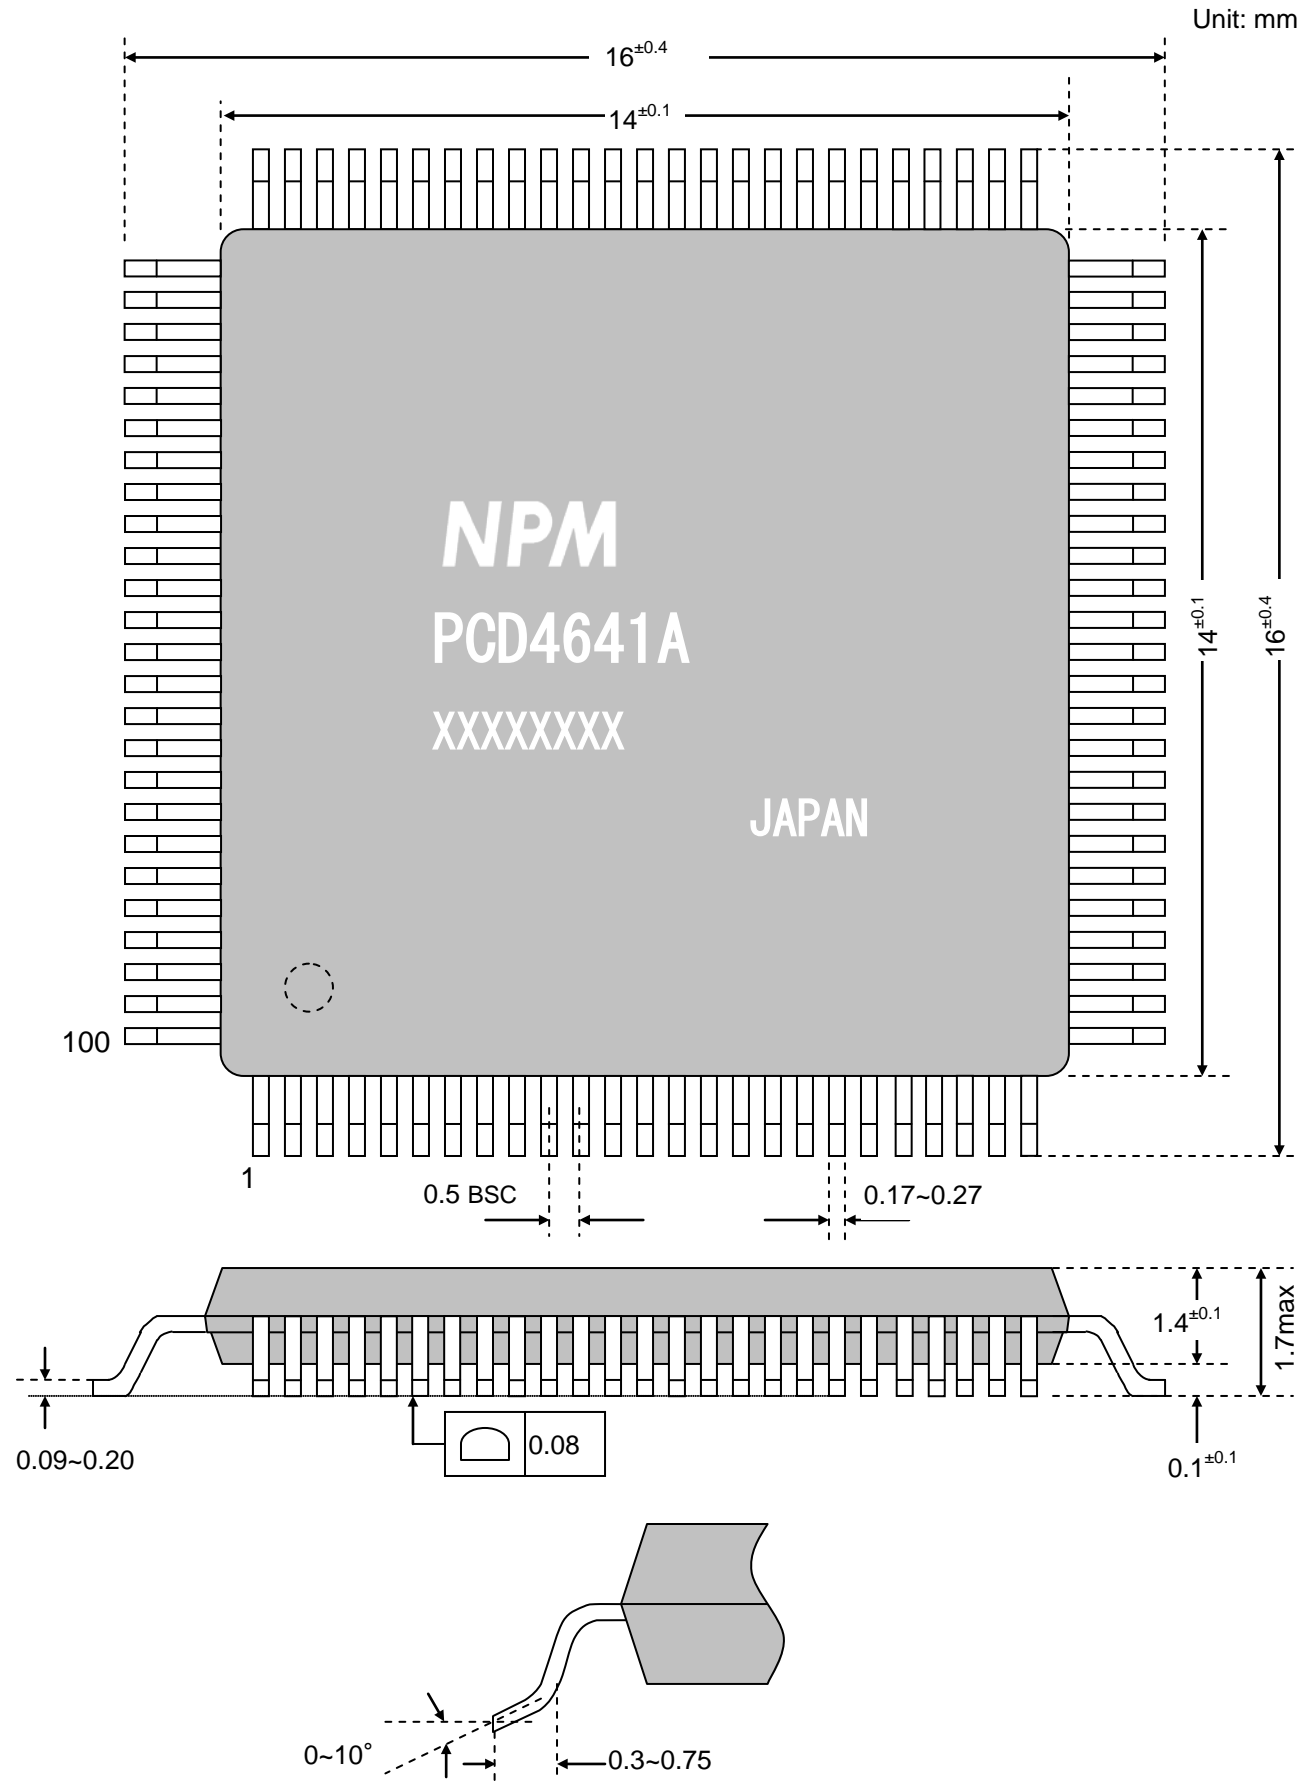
PCD4641A external dimensions (100-pin QFP)
